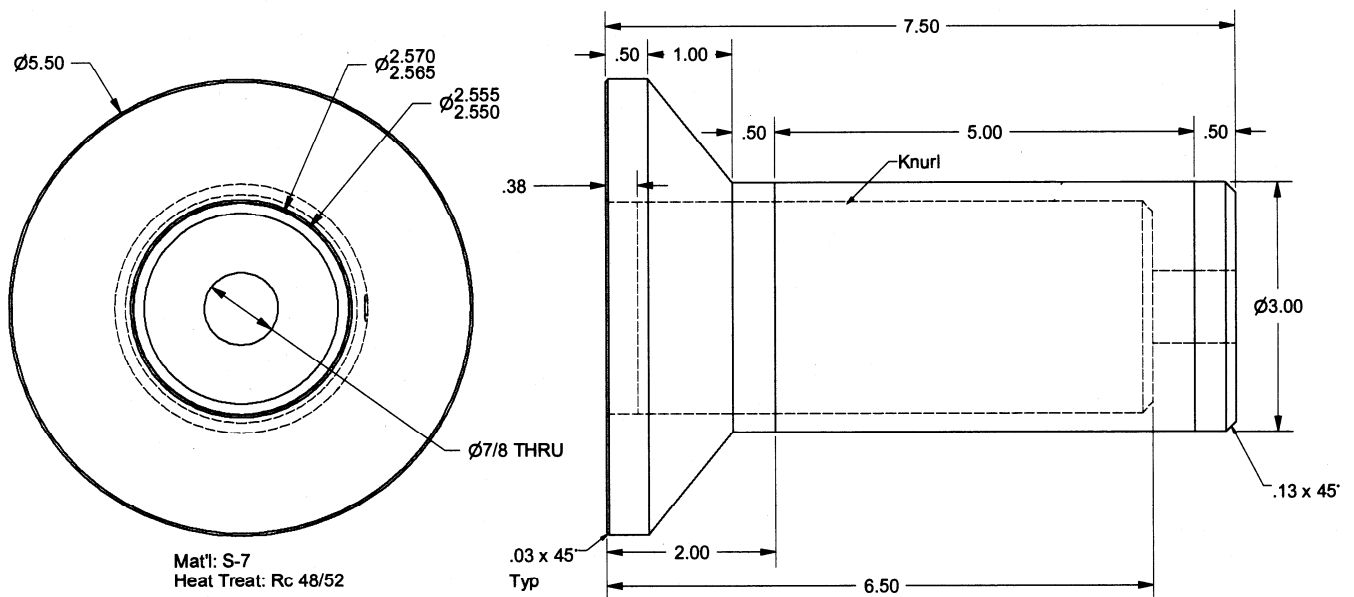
BEARING DRIVER (EQ144021-03)
